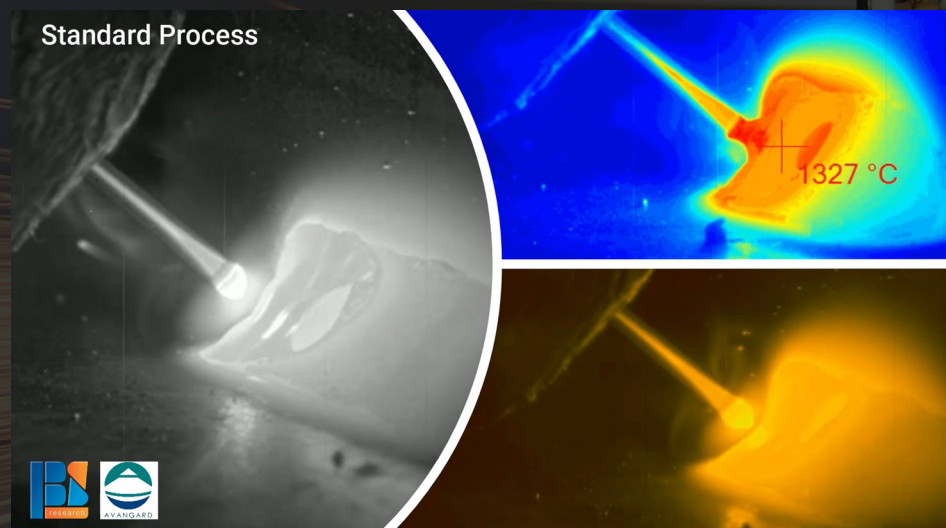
Certifying welding through monitoring (bottom) by BWI.
